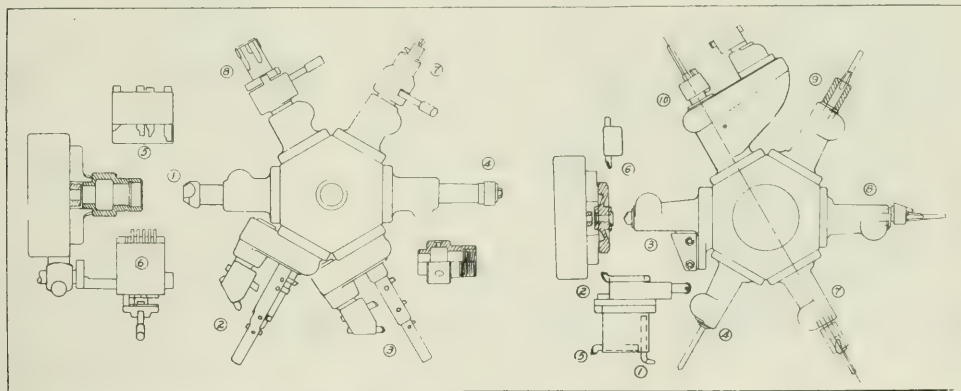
LAYOUT OF TOOLS FOR MACHINING GUN-METAL DISTRIBUTOR BUSH.
